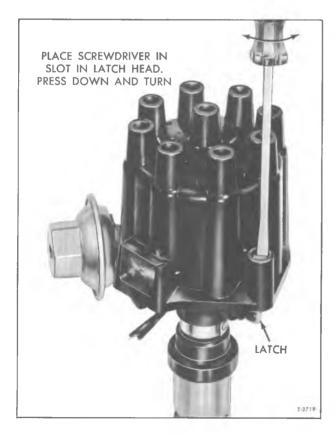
Disengaging Distributor Cap Latches (V8 Engine) (Typical)
